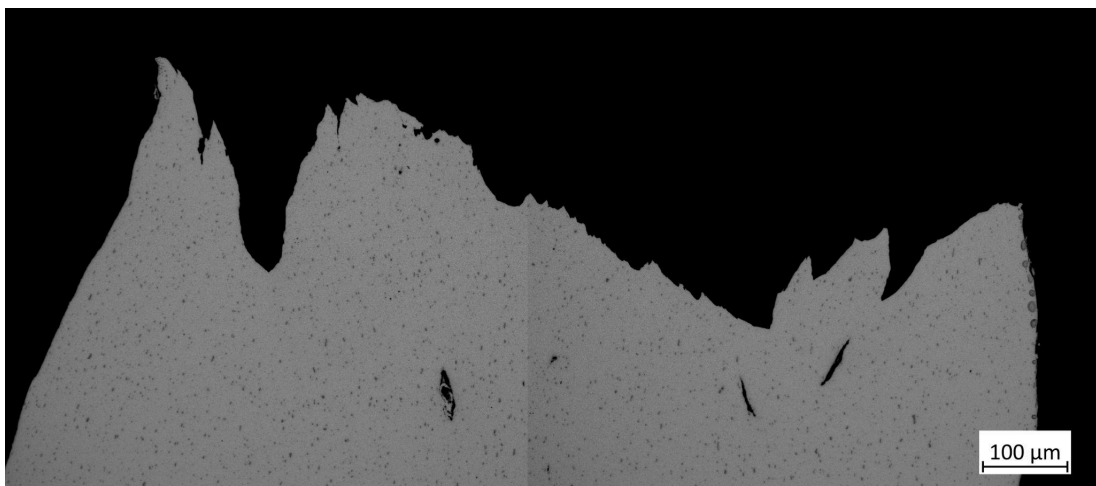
The fracture surface of the tensile test sample that has been air-cooled and aged for 6h at 215°C.
